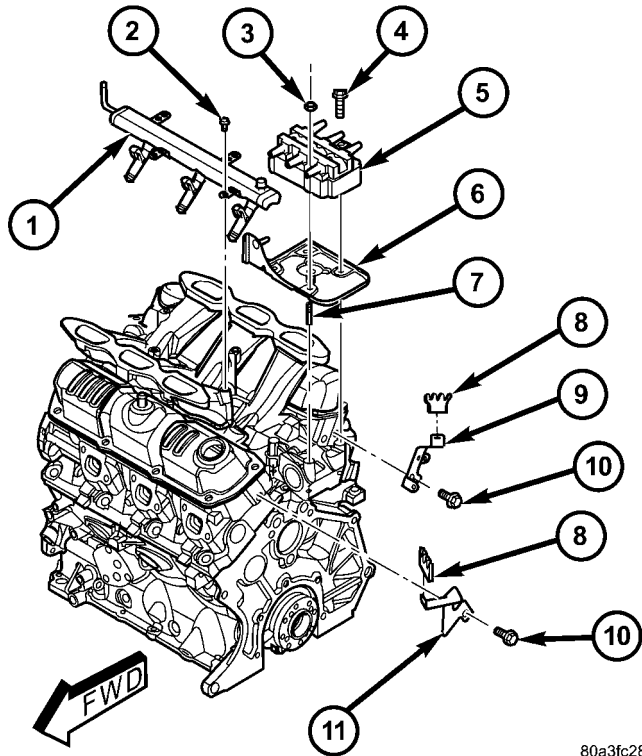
FUEL RAIL AND IGNITION COIL & BRACKET
